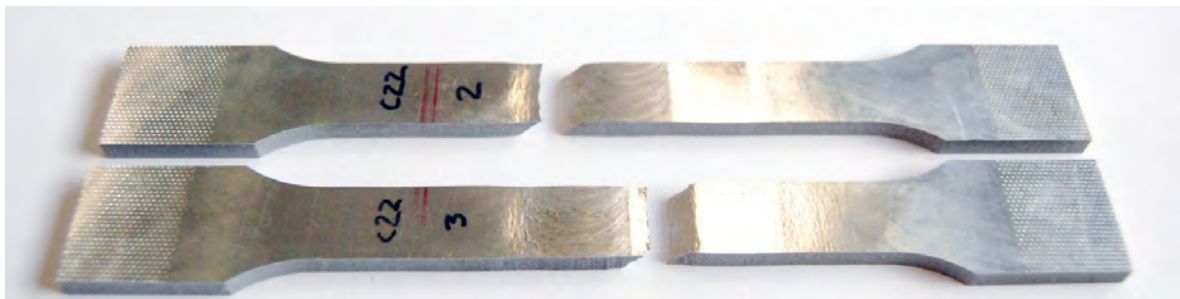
Fracture mode of the welded tensile specimens C_22
